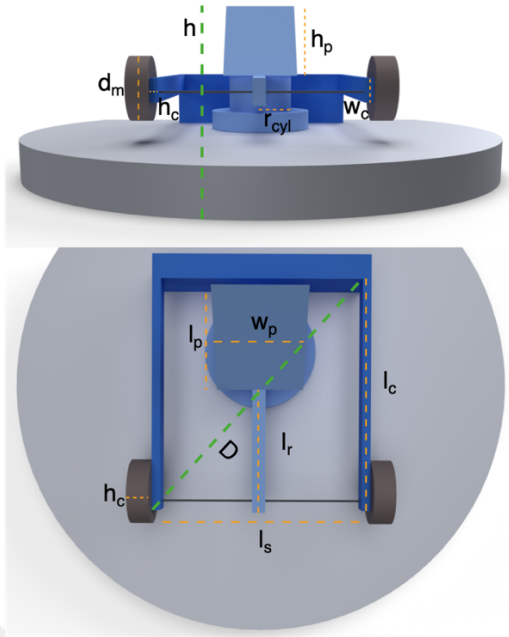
CAD drawing of the designed rotary actuator [1]
